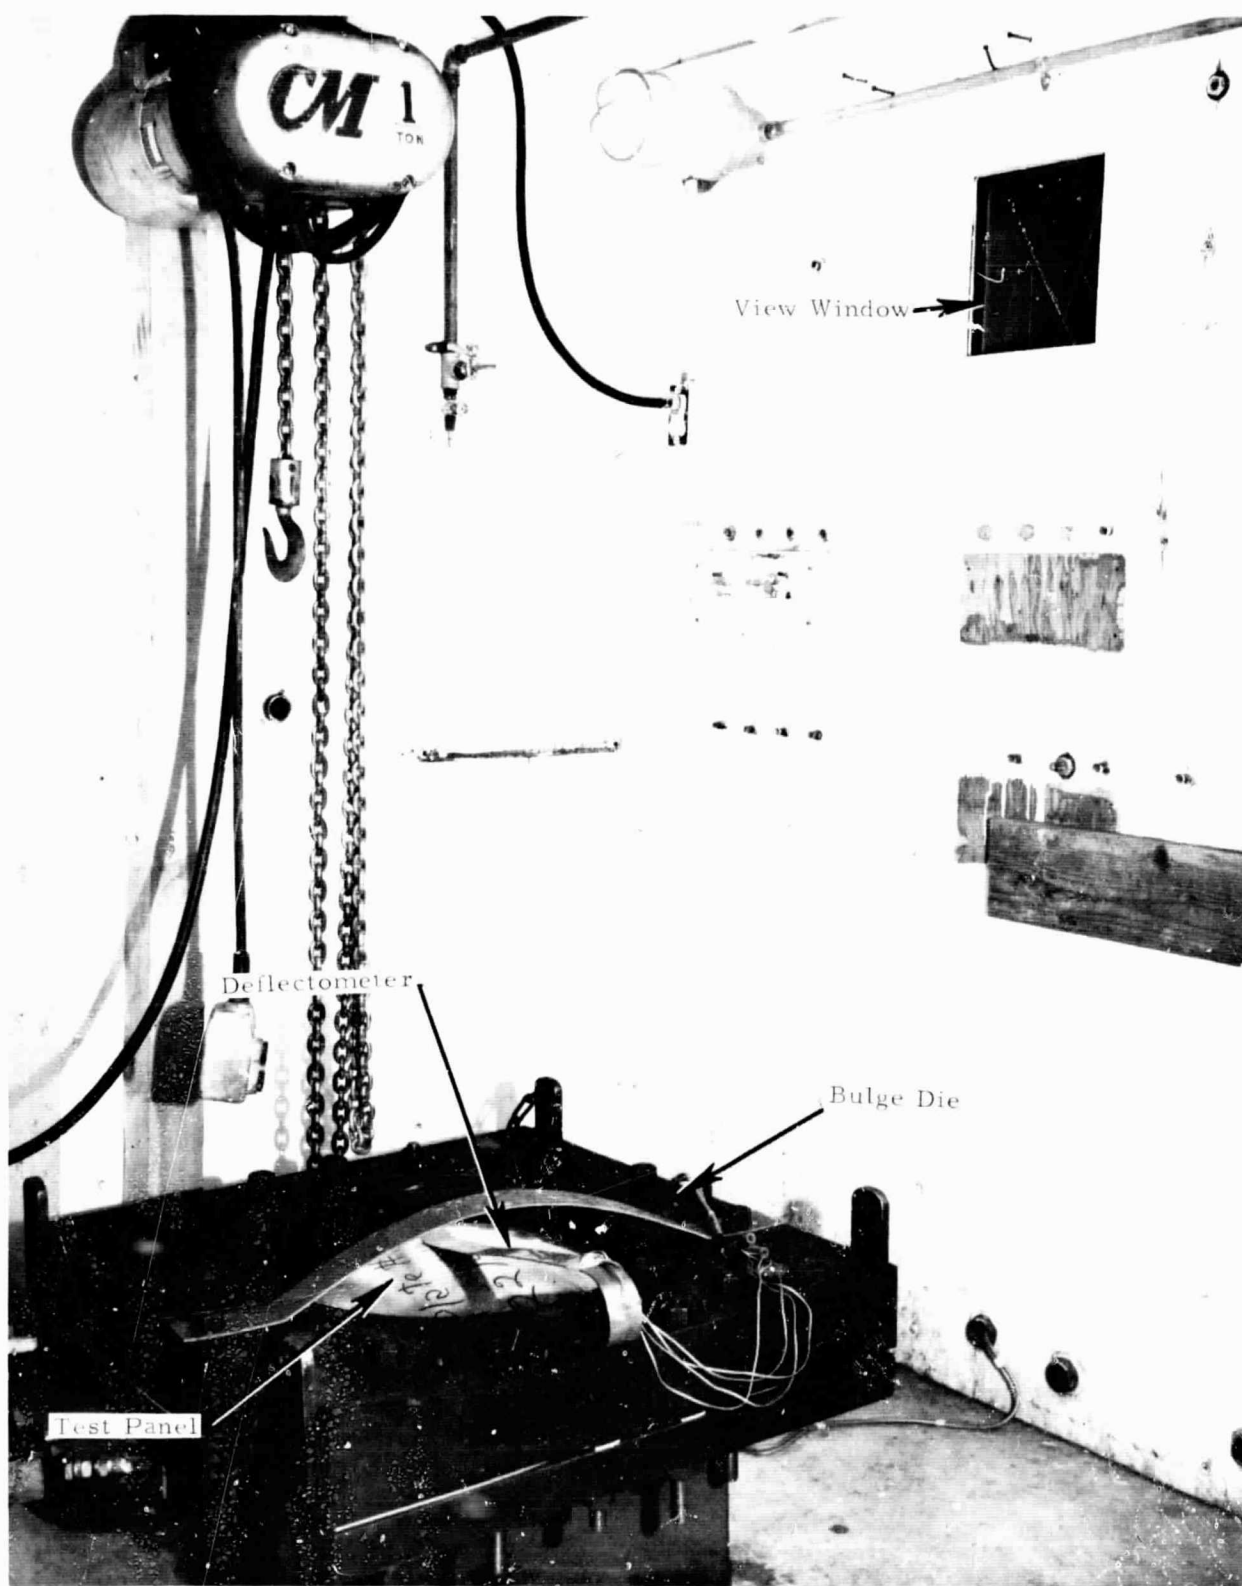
BULGE DIE AND TEST PANEL ASSEMBLY IN TEST CELL
